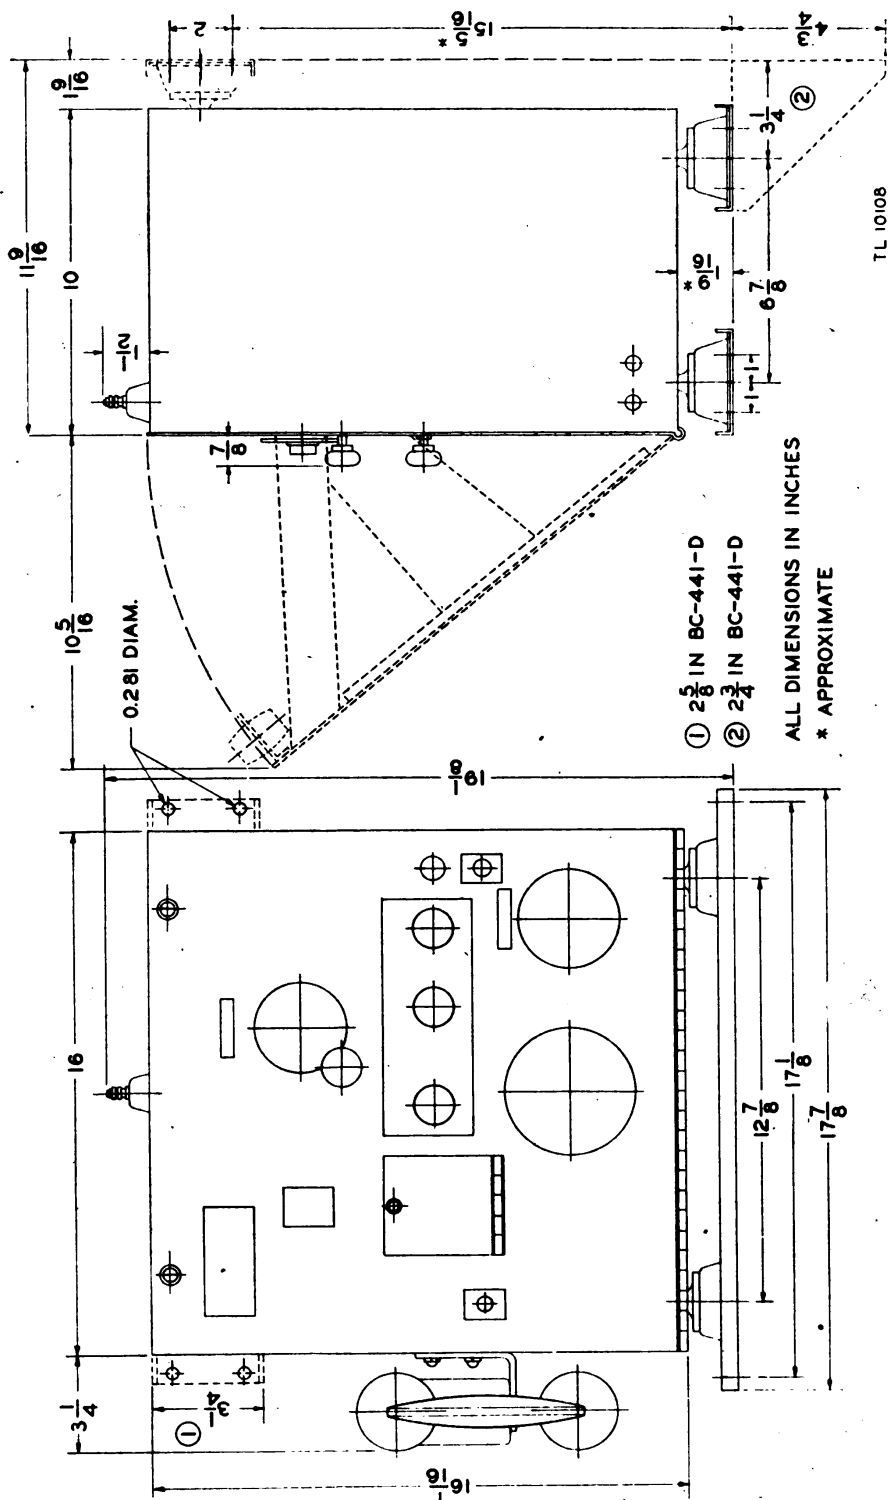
Radio Receiver and Transmitter BC-441-(*)—outline dimension drawing.
